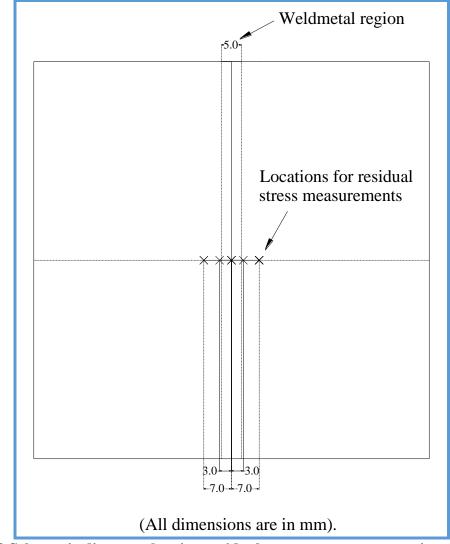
Schematic diagram showing residual stress measurement points in the welded plates.
